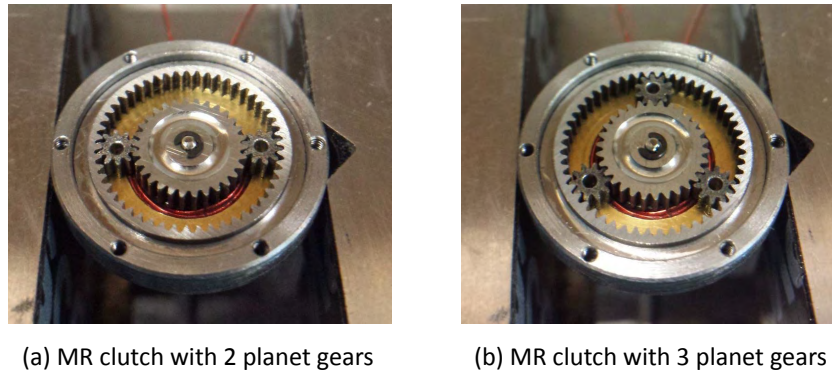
Pictures of the "Planetary" clutch prototype with the 2 and 3 planet gears installed.
